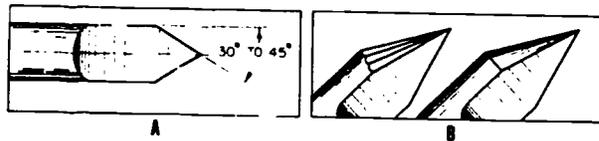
Grinding conical point. A. Cutter angle. B. Rough and finished conical shape.
